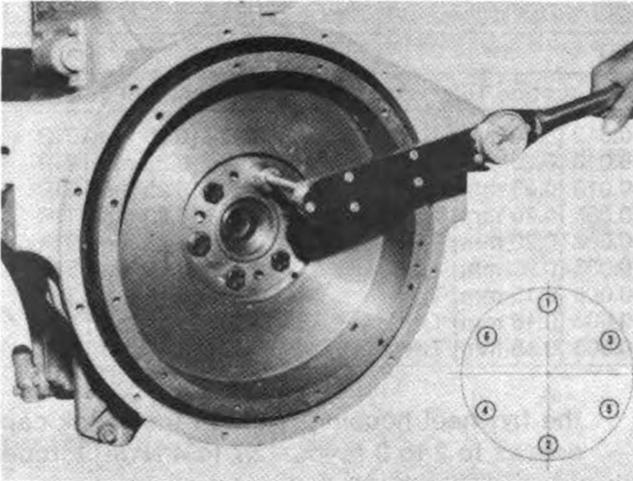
(N11451). Tightening Sequence For The Flywheel Capscrews.
